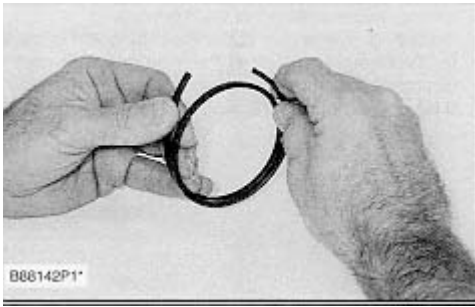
Correct Method To Make (Non-Metal) New Seal Rings Ready For Installation.
